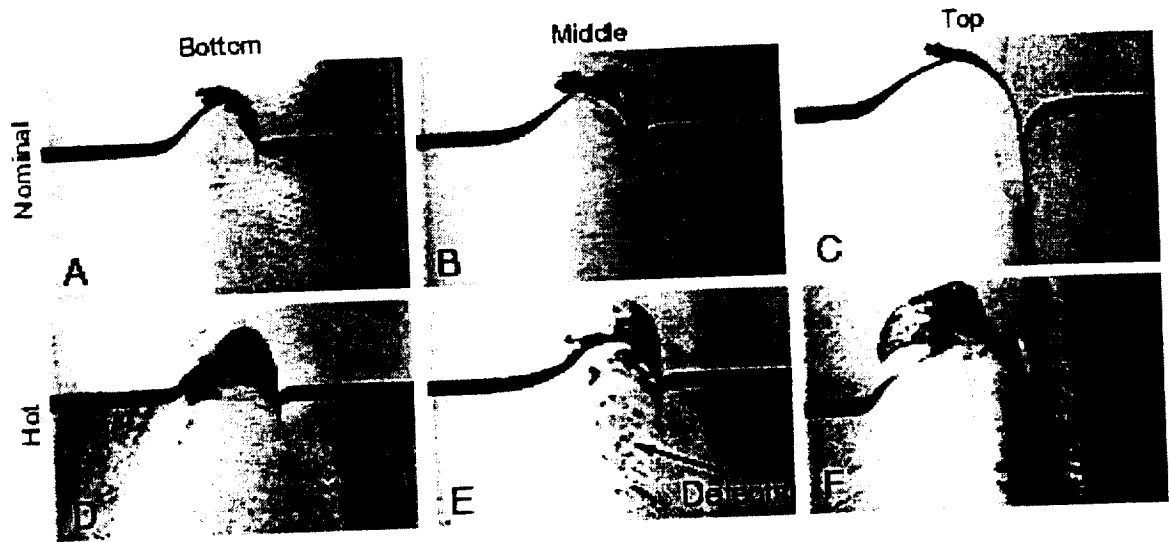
AA5083 hot and nominal welds at the bottom, middle and top, respectively. The images show the marker that covered the total height and width of the welded zone. The welding direction points from the top to the bottom of the page.
